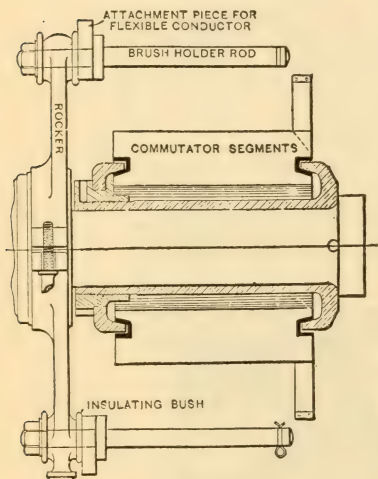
SECTION OF COMMUTATOR AND BRUSH MOUNTING.
